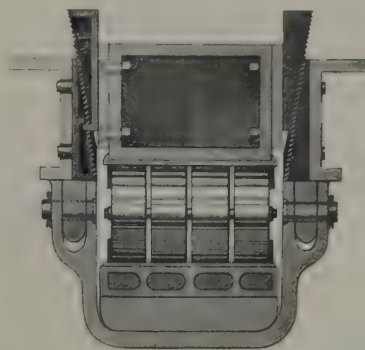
Cast Steel Combined Truck Column or Bolster Guide, Brake Hanger and Spring Seat.
